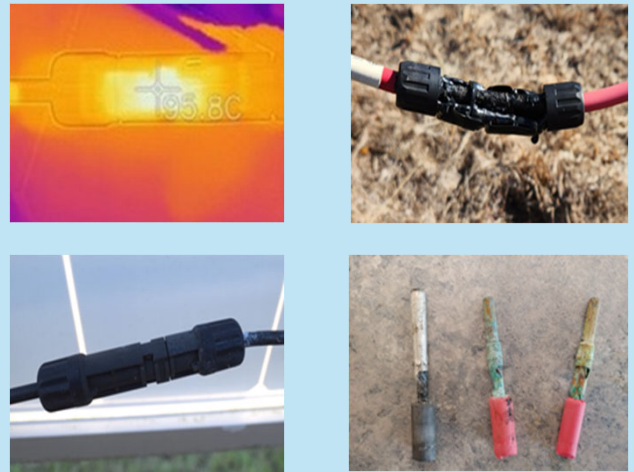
Left to Right: IR image of hot connector; melted connector; external signs of corrosion on the right cable; corroded socket and pins
